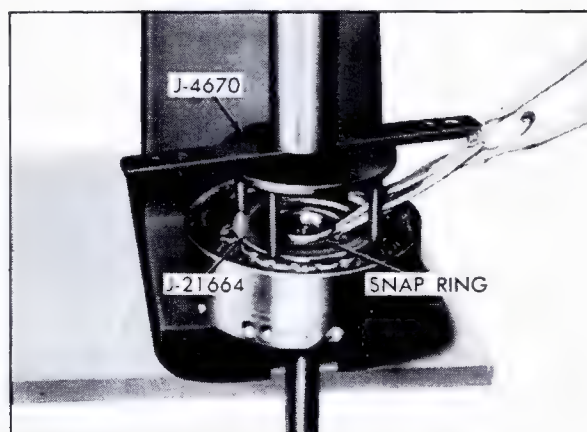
Removing and Installing Forward Clutch Housing Snap Ring
